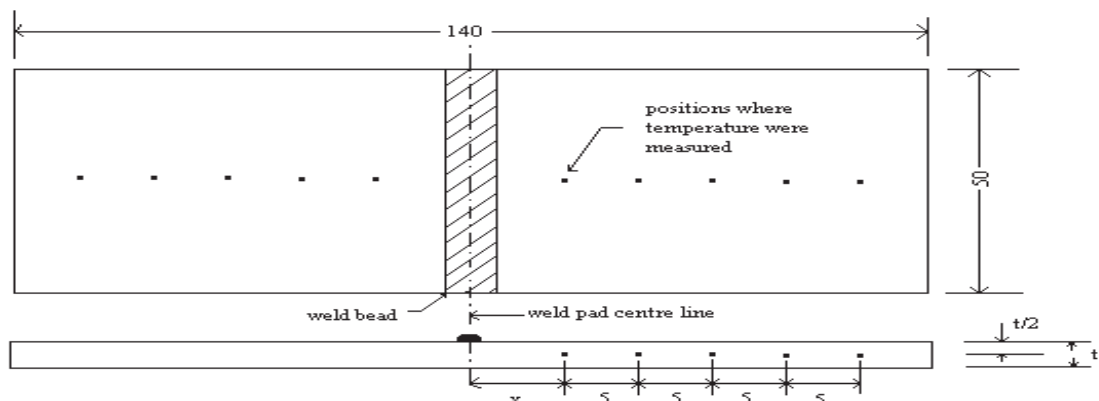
Schematic diagram of weld plate used in experiments, 't' is plate thickness of 6mm and x is 9mm
